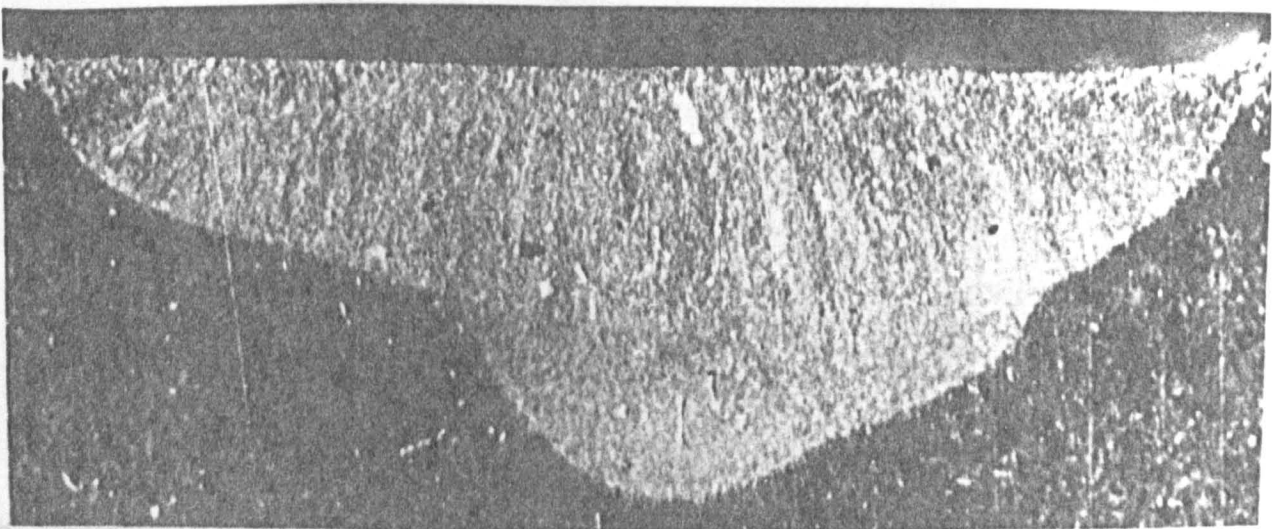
Weld Bead Crack for High Pressure Helium Arc
